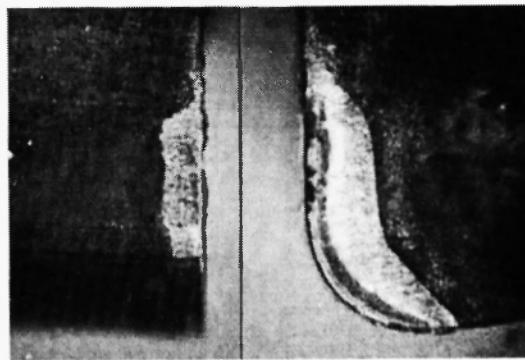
Flank wear (left) and rake face crater wear (right) on Tool 2 (60 m/min)
